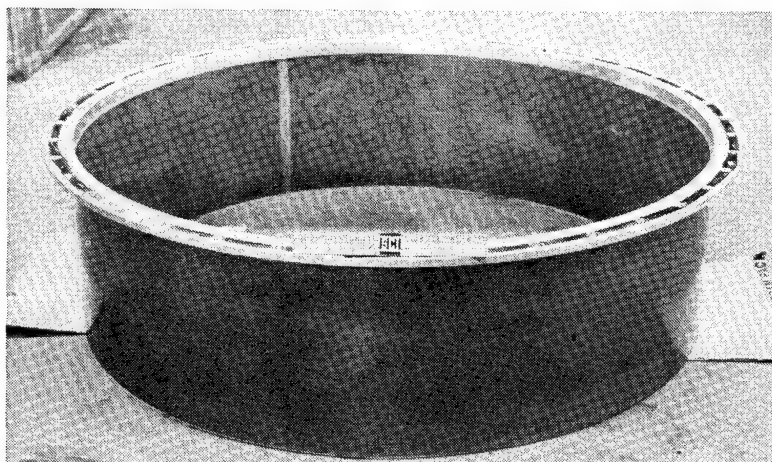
Tank Test Section, 2219 Aluminum Shell, P/N 1269331
